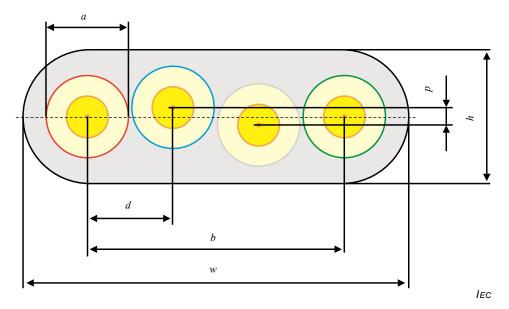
Cross-sectional drawing illustrating fibre ribbon geometry
